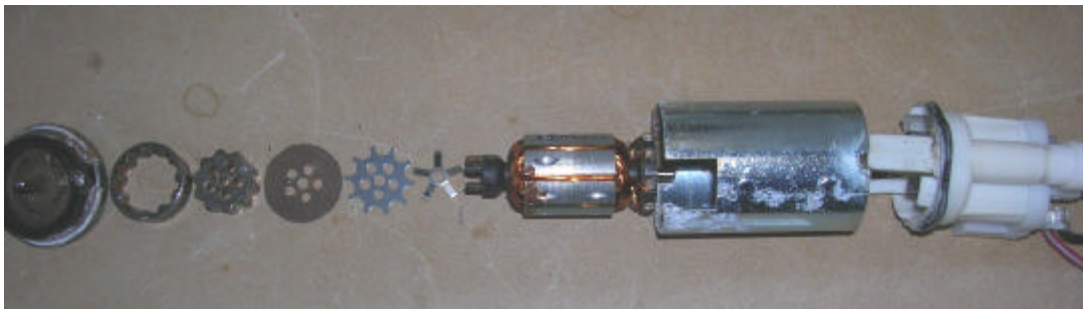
Chrysler Cirrus fuel pump - disassembled.
